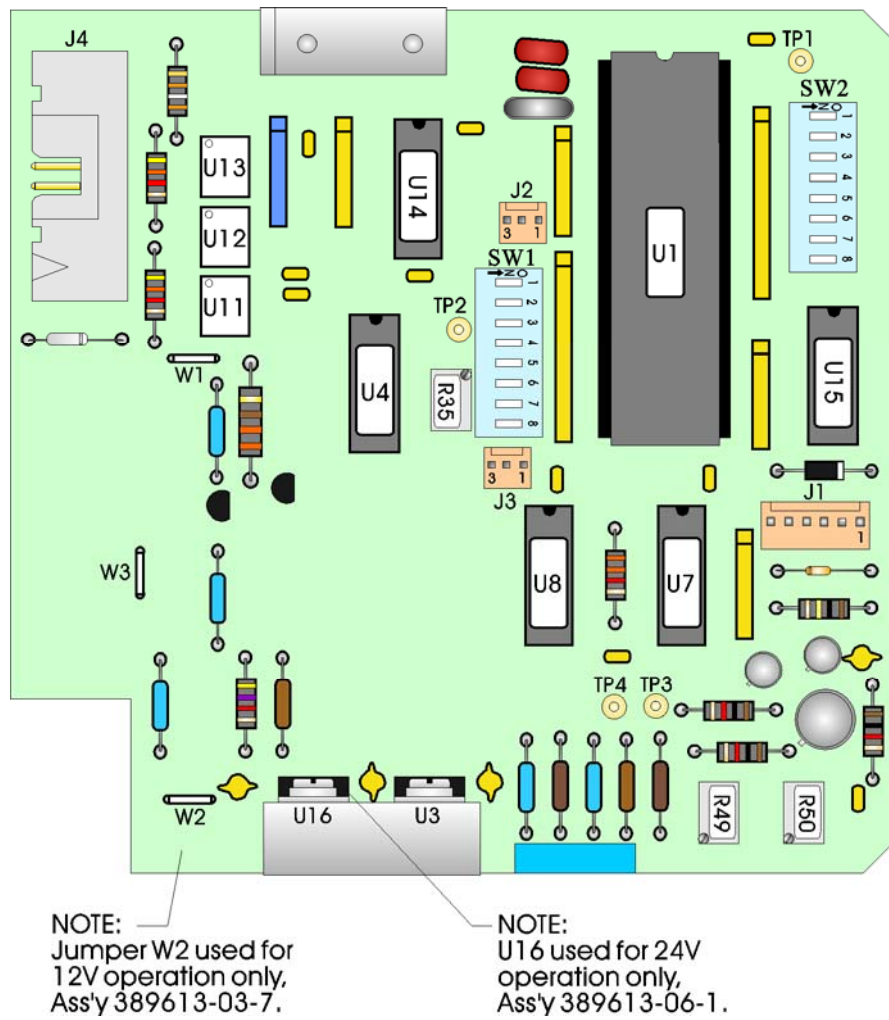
C-20 - Assembly, Raise/Lower Type CPU Board with Current Output
